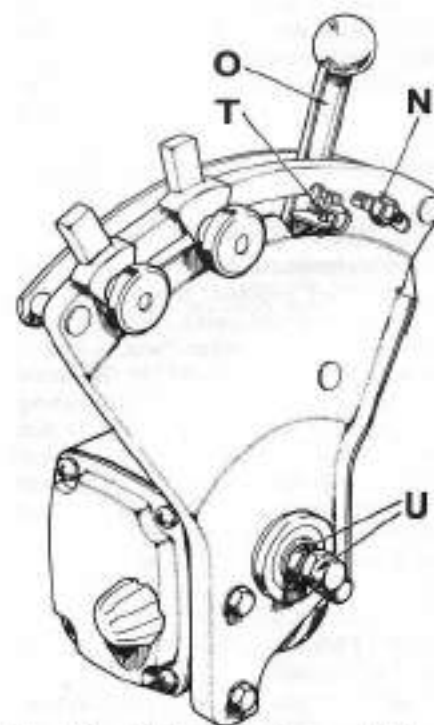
Hydraulic system control lever adjusting points; refer to text for procedure.
